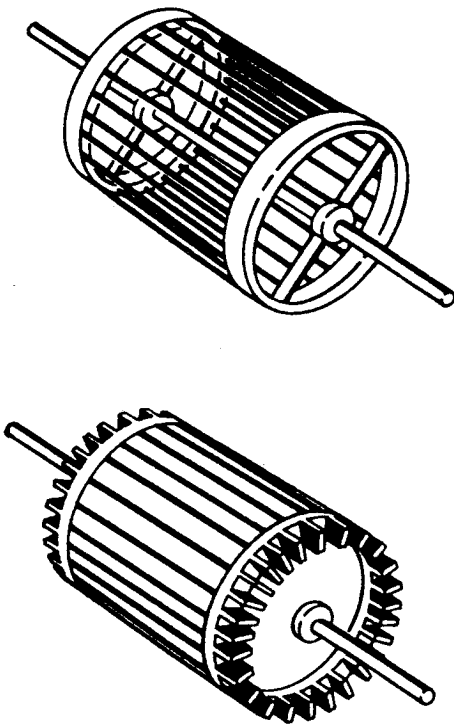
Squirrel Cage Induction Motor Rotor.
